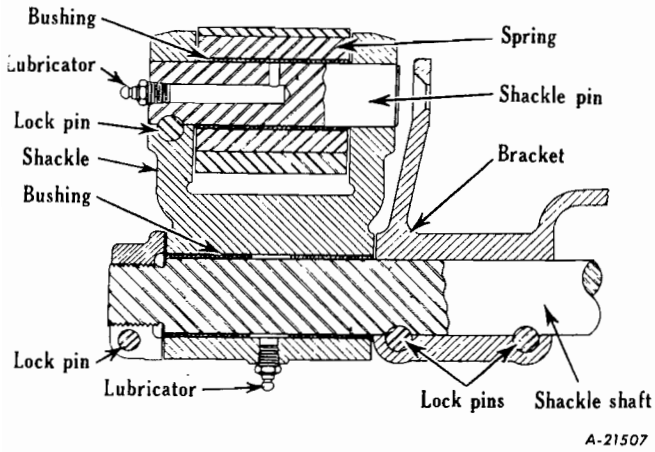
Rear Spring Rear Shackle For Models L-194, L-200, L-204, L-205, L-210.
